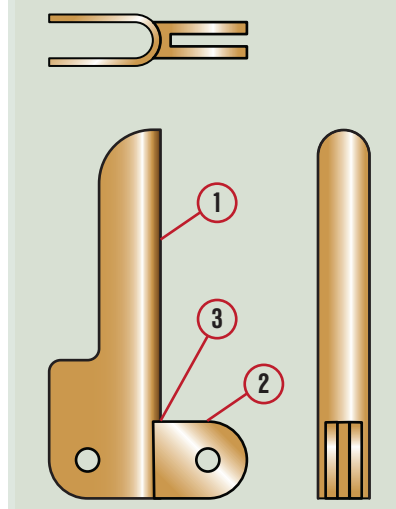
Handle grip subassembly, twice size. 1 — Handle grip; 2 — Grip extension; 3 — soft solder 1 and 2 together.
